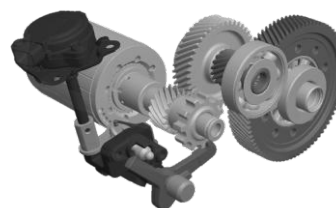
State-of-the-art Park Lock system with pawl and locking wheel integrated into the reducer gearbox of a BEV
